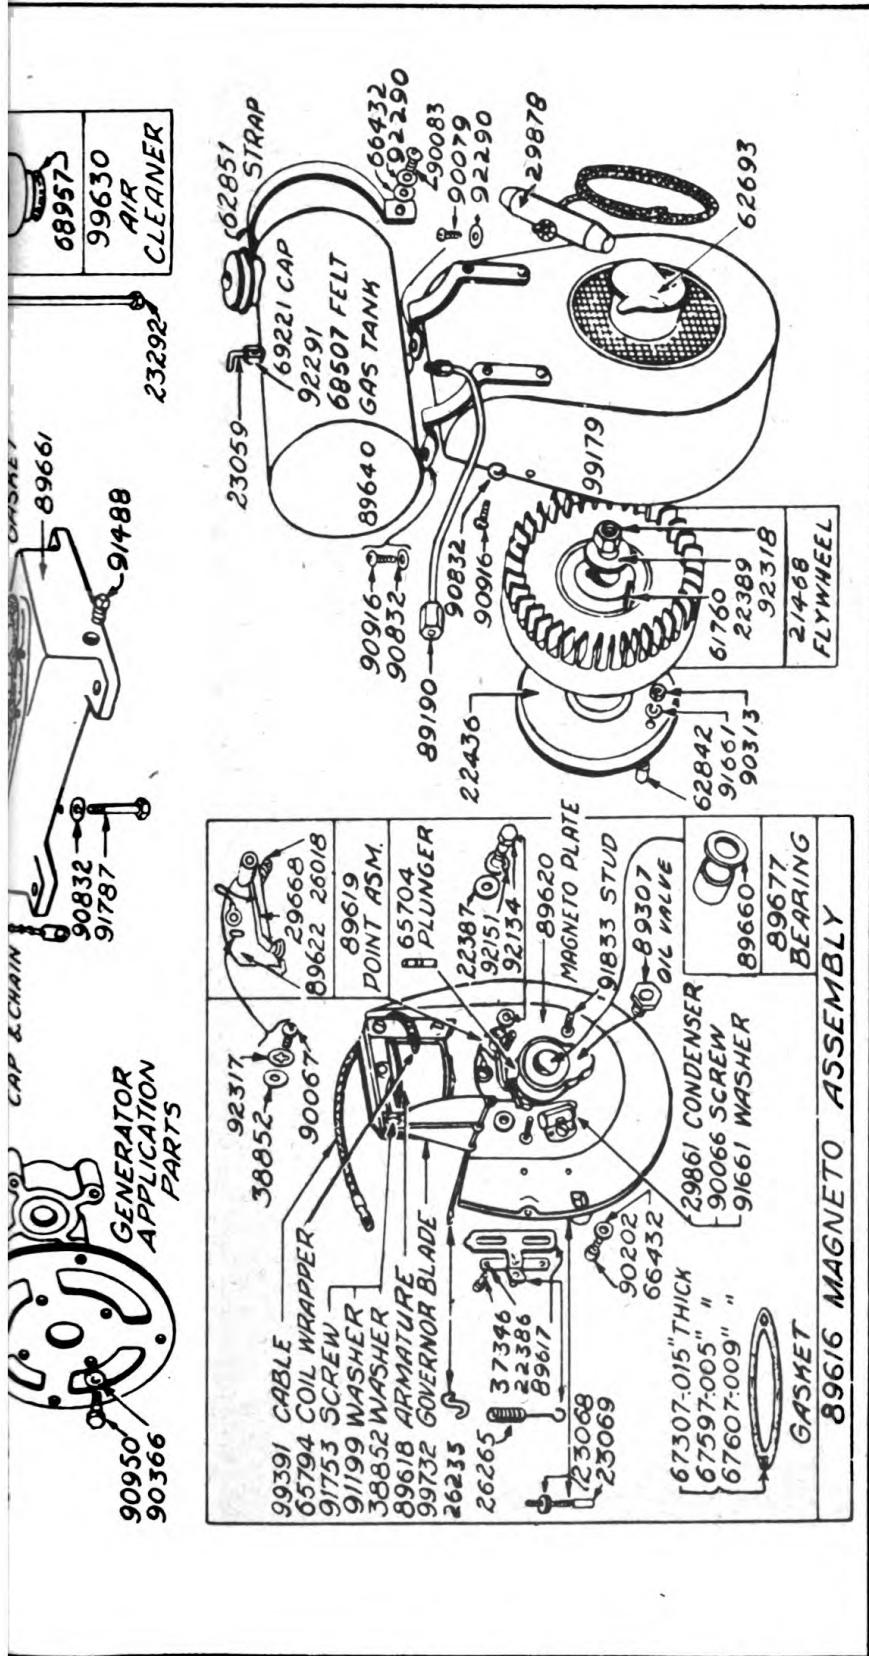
Power Unit PE-77-A, B and C, engine parts
